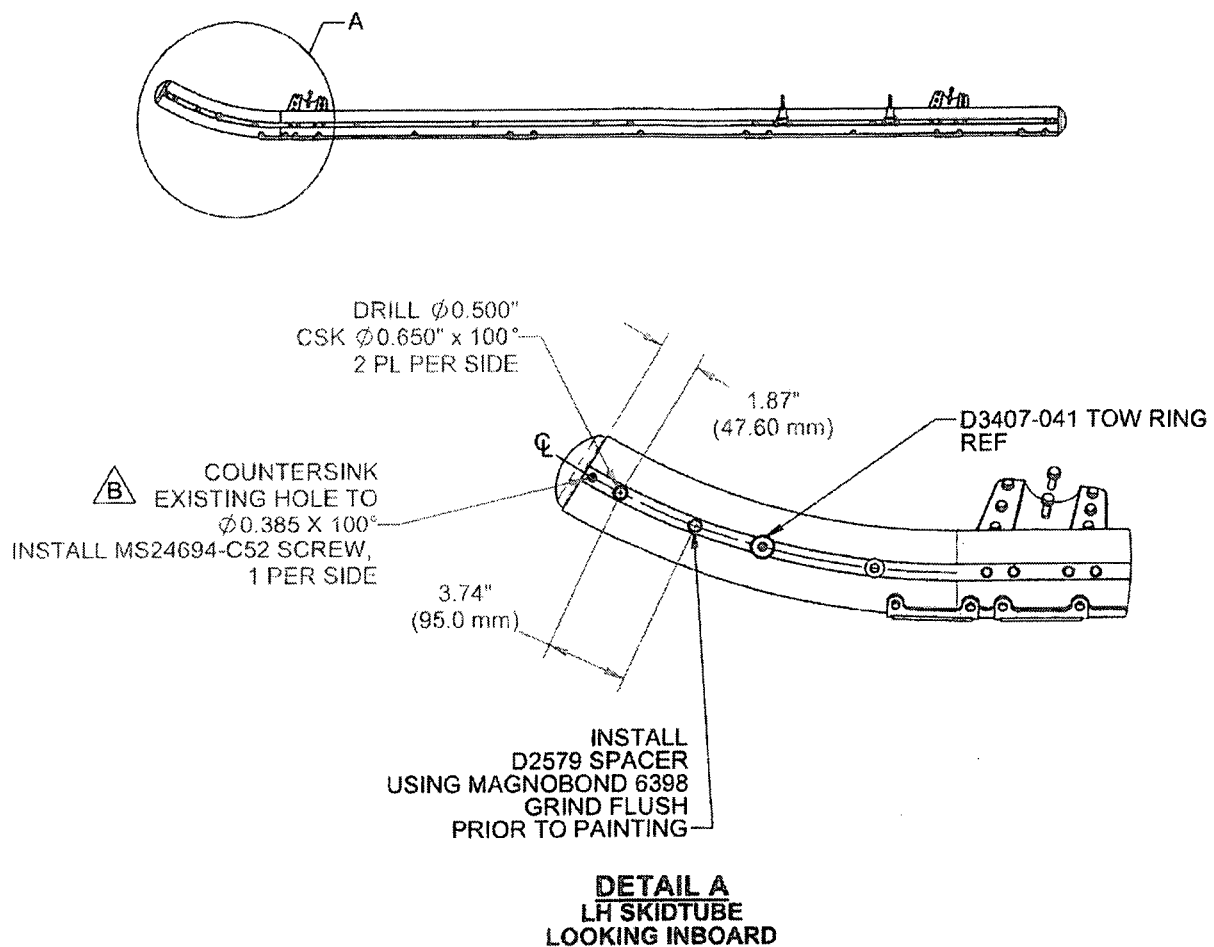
MODIFIED D119-646-XXX SKIDTUBE
